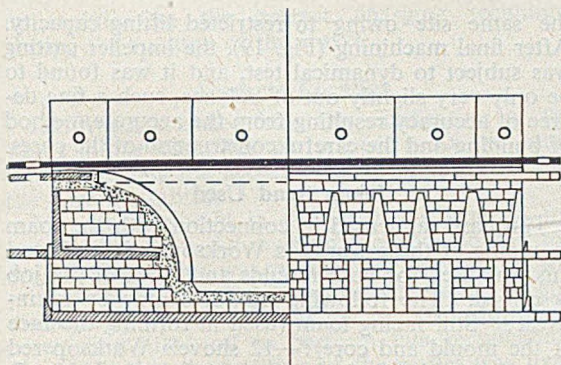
Half-section and Part Exterior View of the Impeller Bottom-half Mould, showing the First Core Assembly.
